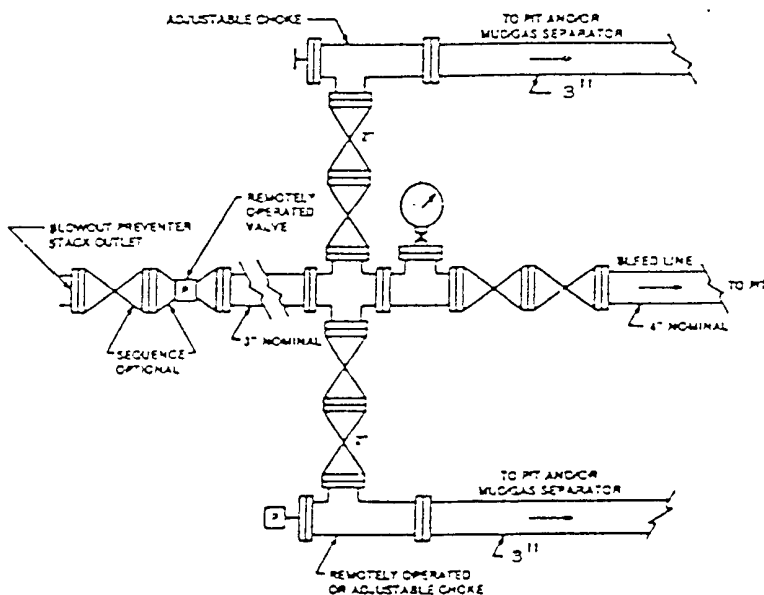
Typical choke manifold assembly for 15M rated wellhead pressure service — surface installation.
